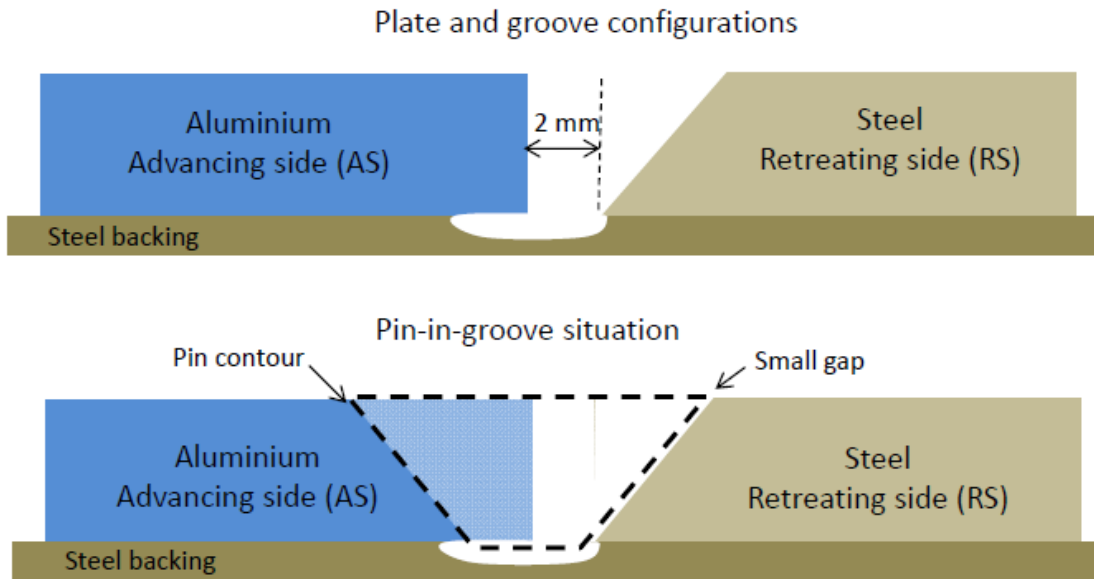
HYB on dissimilar welding, first attempt; Ø.Grong, Personal Communication
